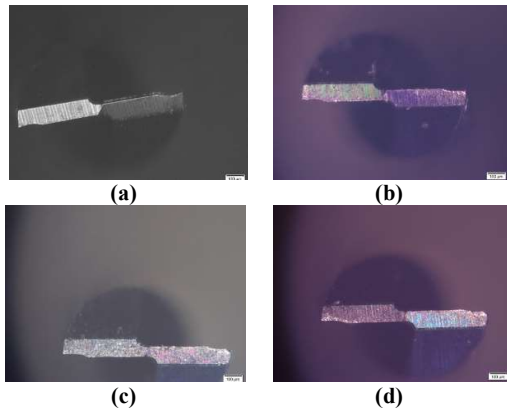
Condition of the tool after (a) 10 mm, (b) 220 mm, (c) 620 mm and (d) 1100 mm length of cut
